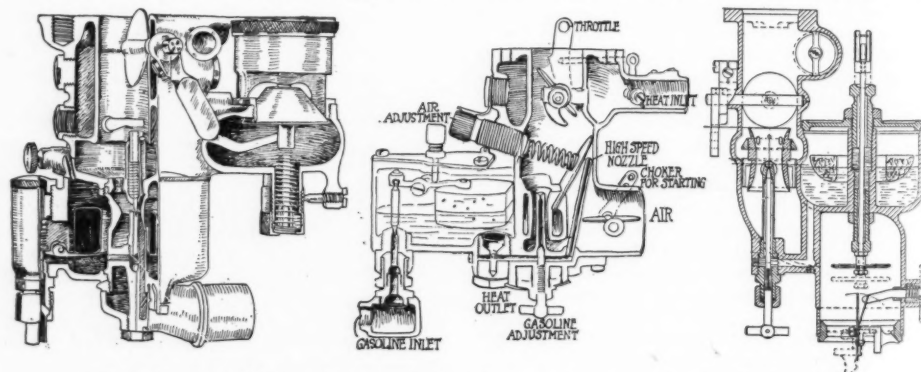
The Webber, Marvel and the Kerosene Burning. In the Webber instrument the air-valve adjustment is locked with a pin which turns into the threads of the screw. The Marvel instrument has a needle-valve adjustment in the bottom and an air-valve setting. The Kerosene burning instrument embodies a double-float arrangement, as is becoming common practice in carbureters of this kind
